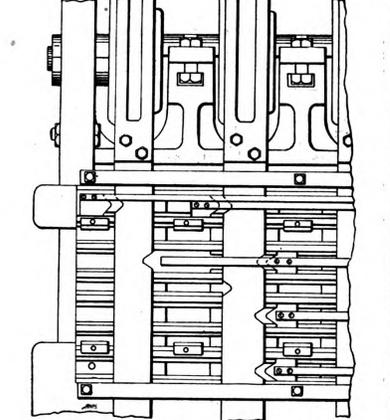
A.—Detail of Johnson Interlocking Machine.
